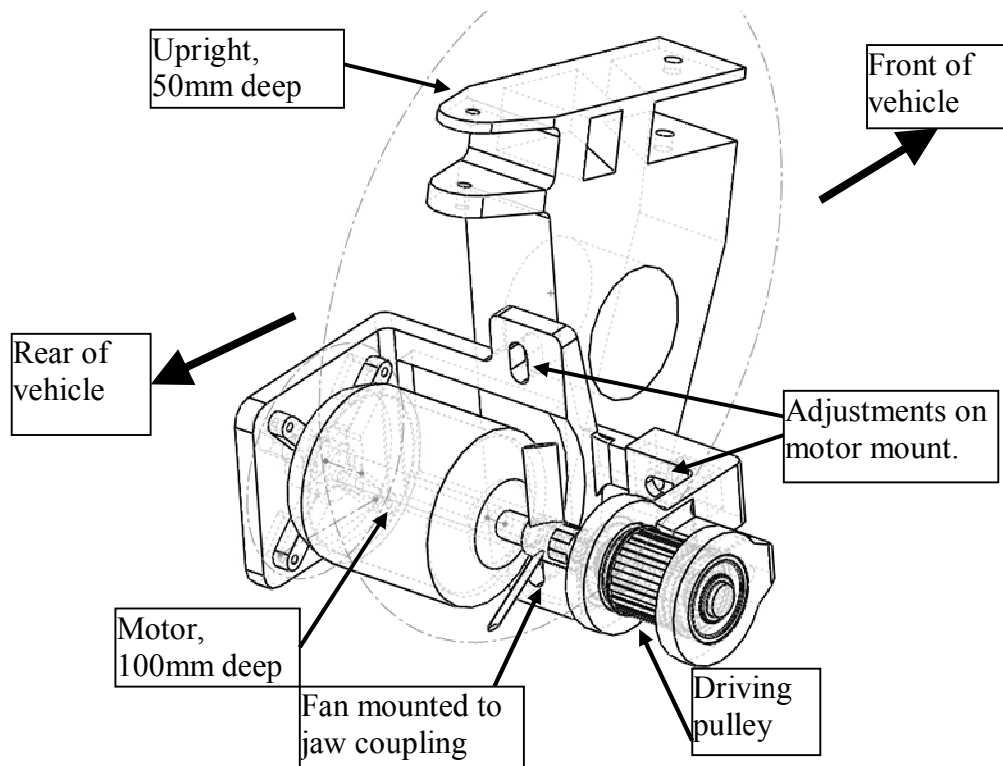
Ambitious but impractical design shown for the left rear wheel hub. The wheel, stub axle and driven pulley are not shown.
